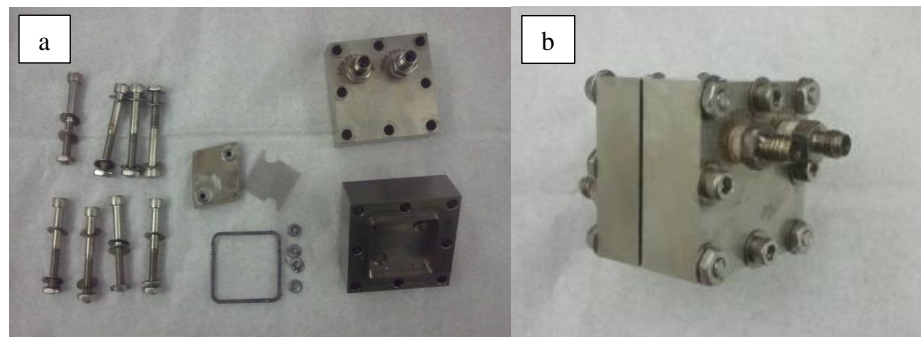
The Technology Development Vehicle before (a) and after (b) assembly.
